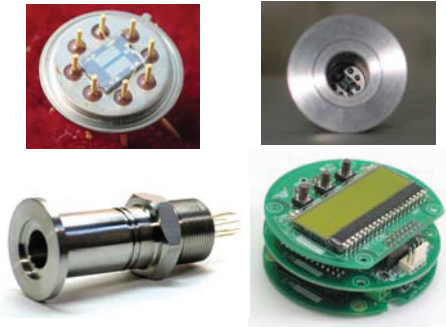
Multipurpose thermal sensor for vacuum measurements mounted on a TO-8 housing and welded into a specially designed transducer housing and intelligent sensor control unit.
